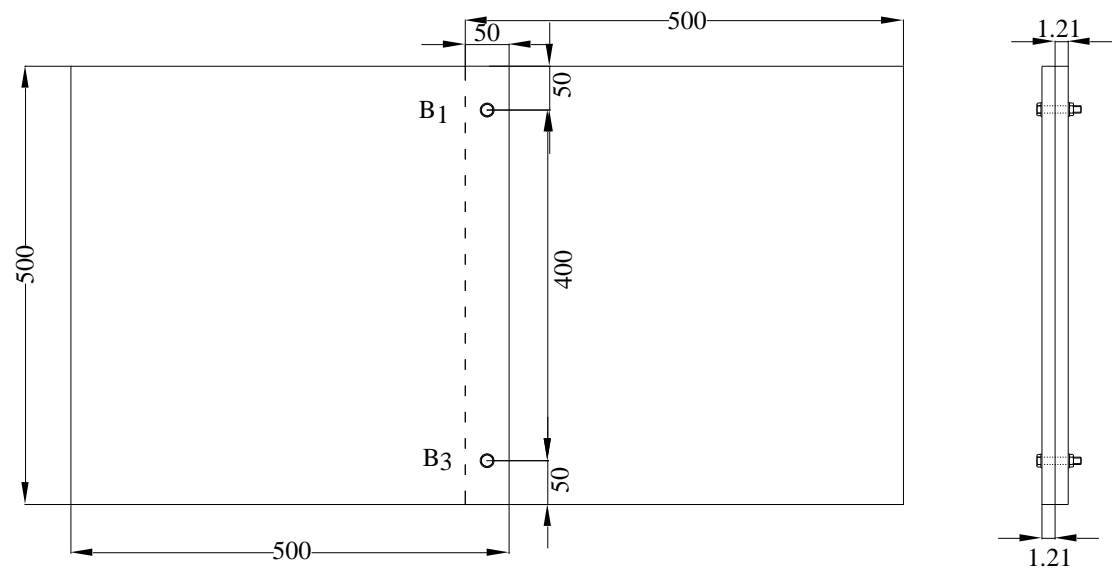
Geometric dimensions of plates with bolted lap joint (Case-2)
